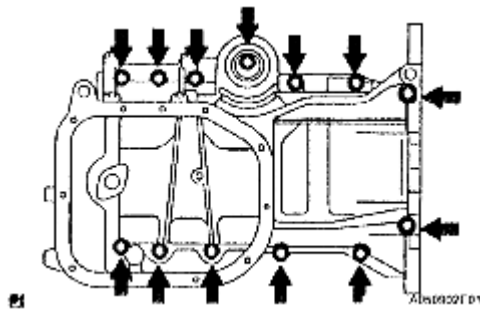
Locating Oil Pan Sub-Assembly Bolts
